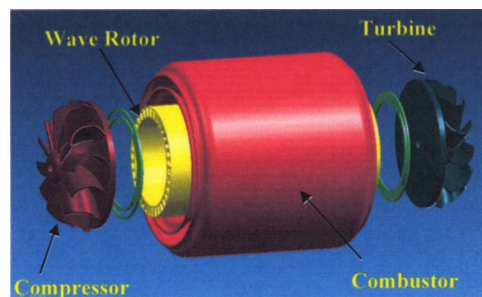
Schematic example of the physical implementation of a wave rotor in a gas turbine (exploded view, piping not shown)
